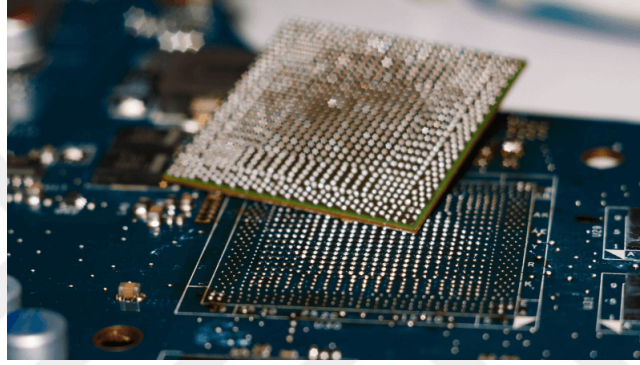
A BGA component and solder pads on both PCB and the component. [2]
